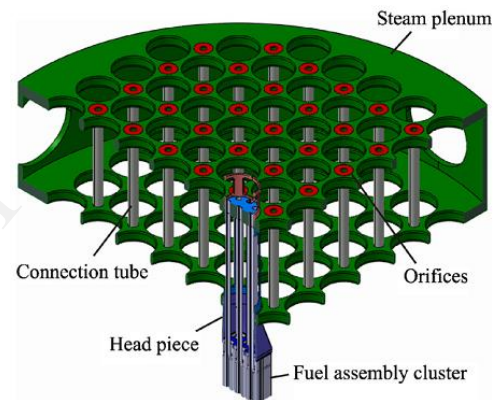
Steam plenum with fuel assembly cluster and head piece.
